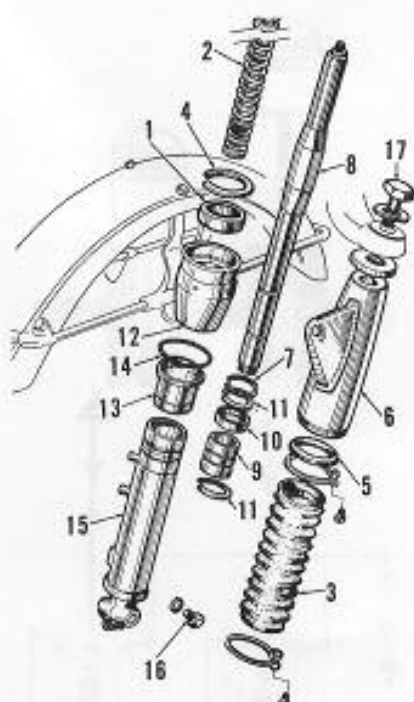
Exploded view of early CL front suspension unit. Early CB models are similar.
